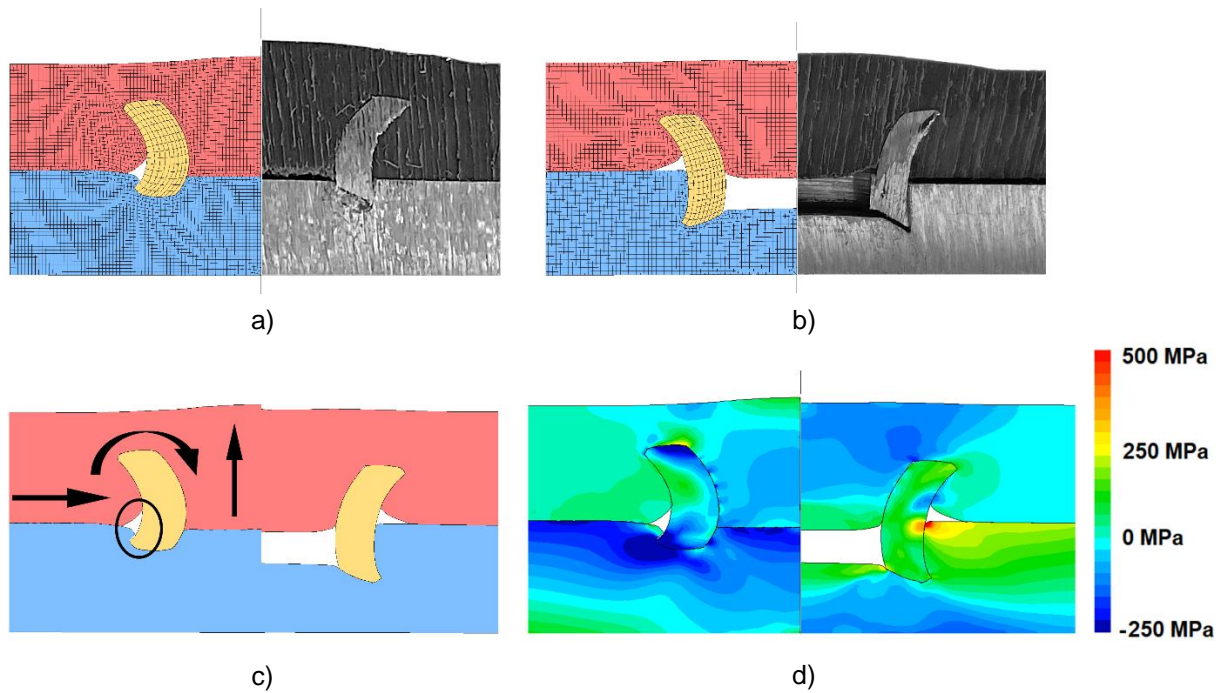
Double-sided self-pierce riveting (DSSPR) of AA5754-H111 aluminum and PVC sheets with AISI 304 stainless-steel rivets with chamfered angles of 45° .
